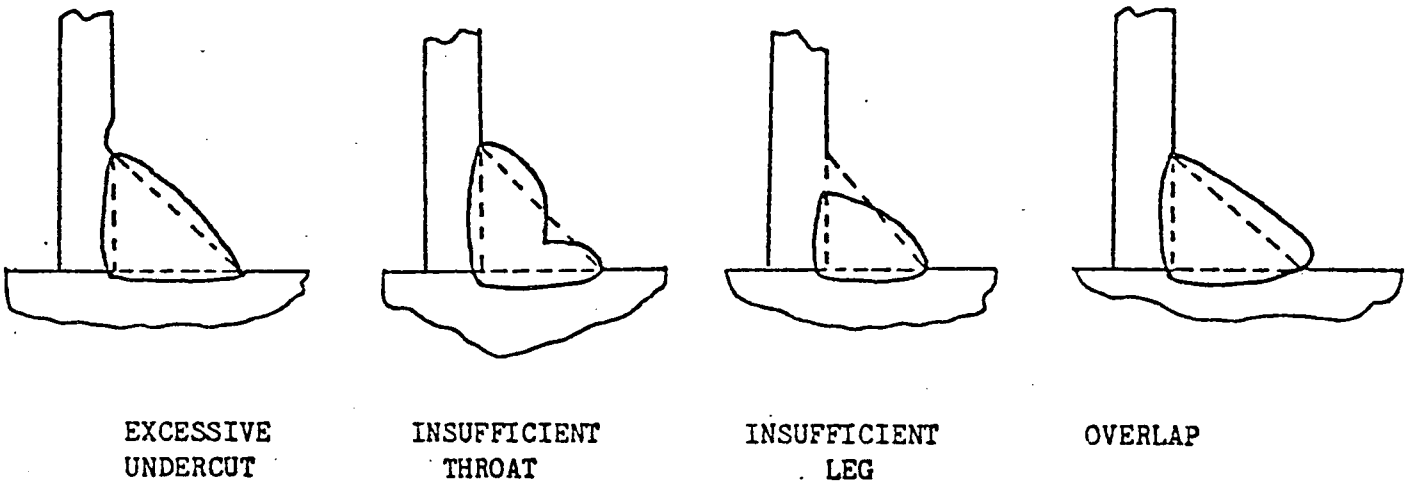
Unacceptable Fillet Weld Profiles
